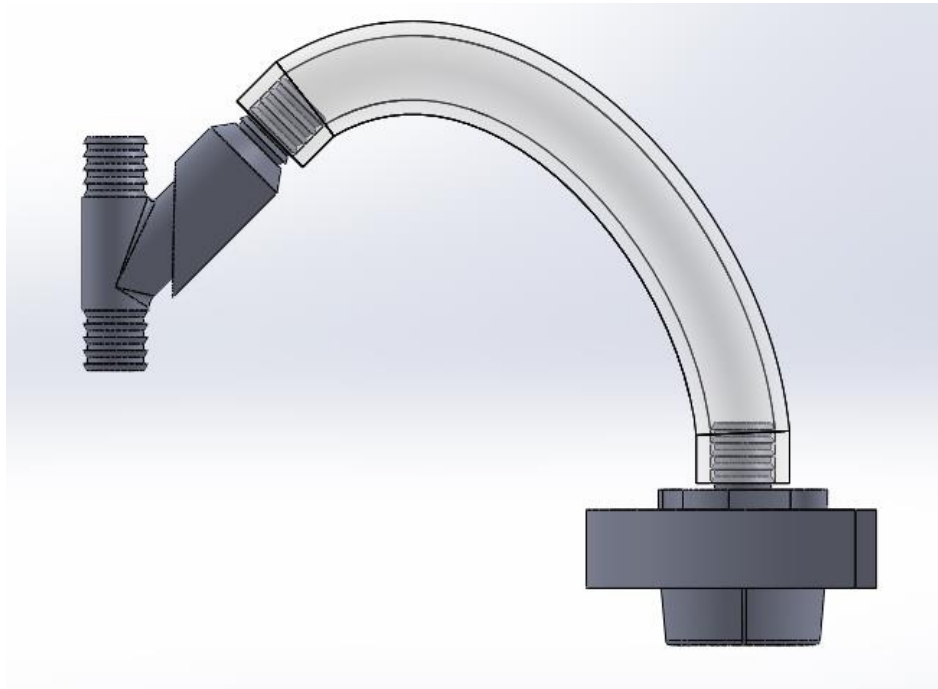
Humidifier Cap with the Connected Hose and Fittings (Side View)
